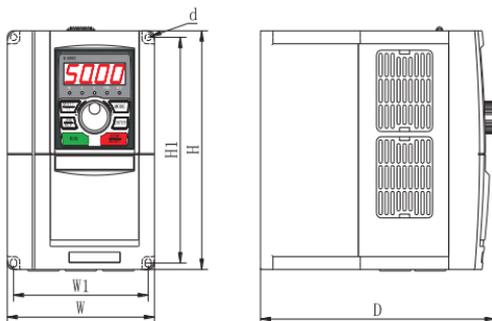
1 (Model A) Inverter Outline & Dimension
